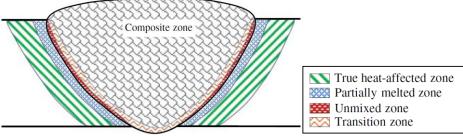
Schematic showing regions of a Fusion Weld (Lippold, 2015)
